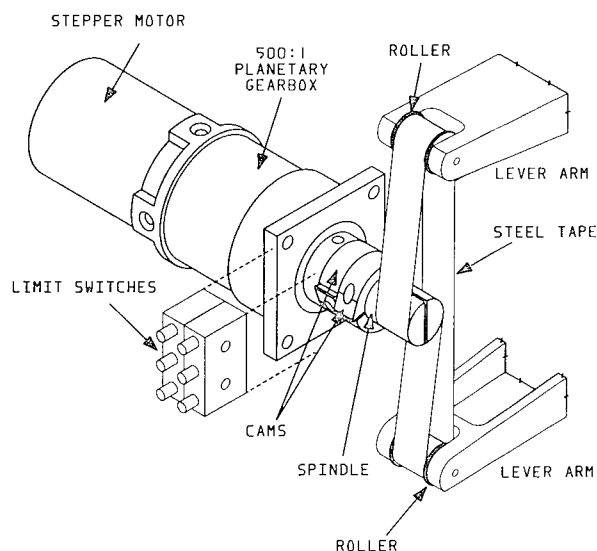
Motor and Gear-Box Drive Mechanism Detail
